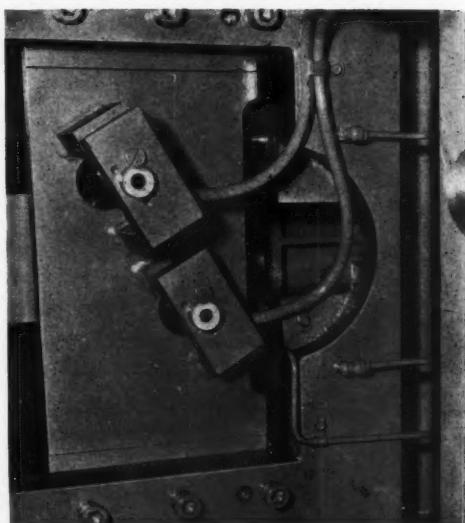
This close-up view shows the method employed for mounting two sensing heads in different planes on a drill bush plate
